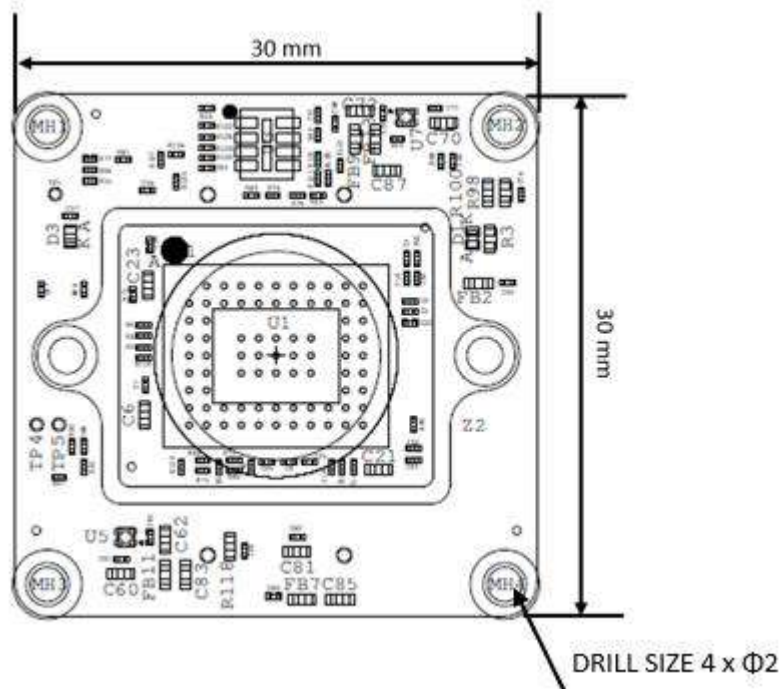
e-CAM200\_CUOAGX Mod Board Front View Mechanical Dimensions
